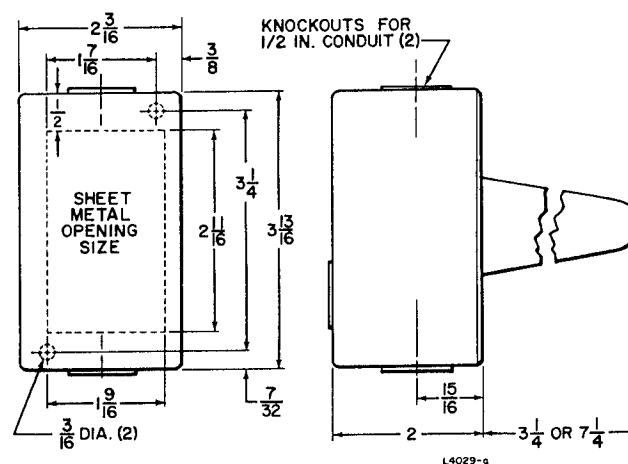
Approximate Mounting and Case Dimensions in Inches.
